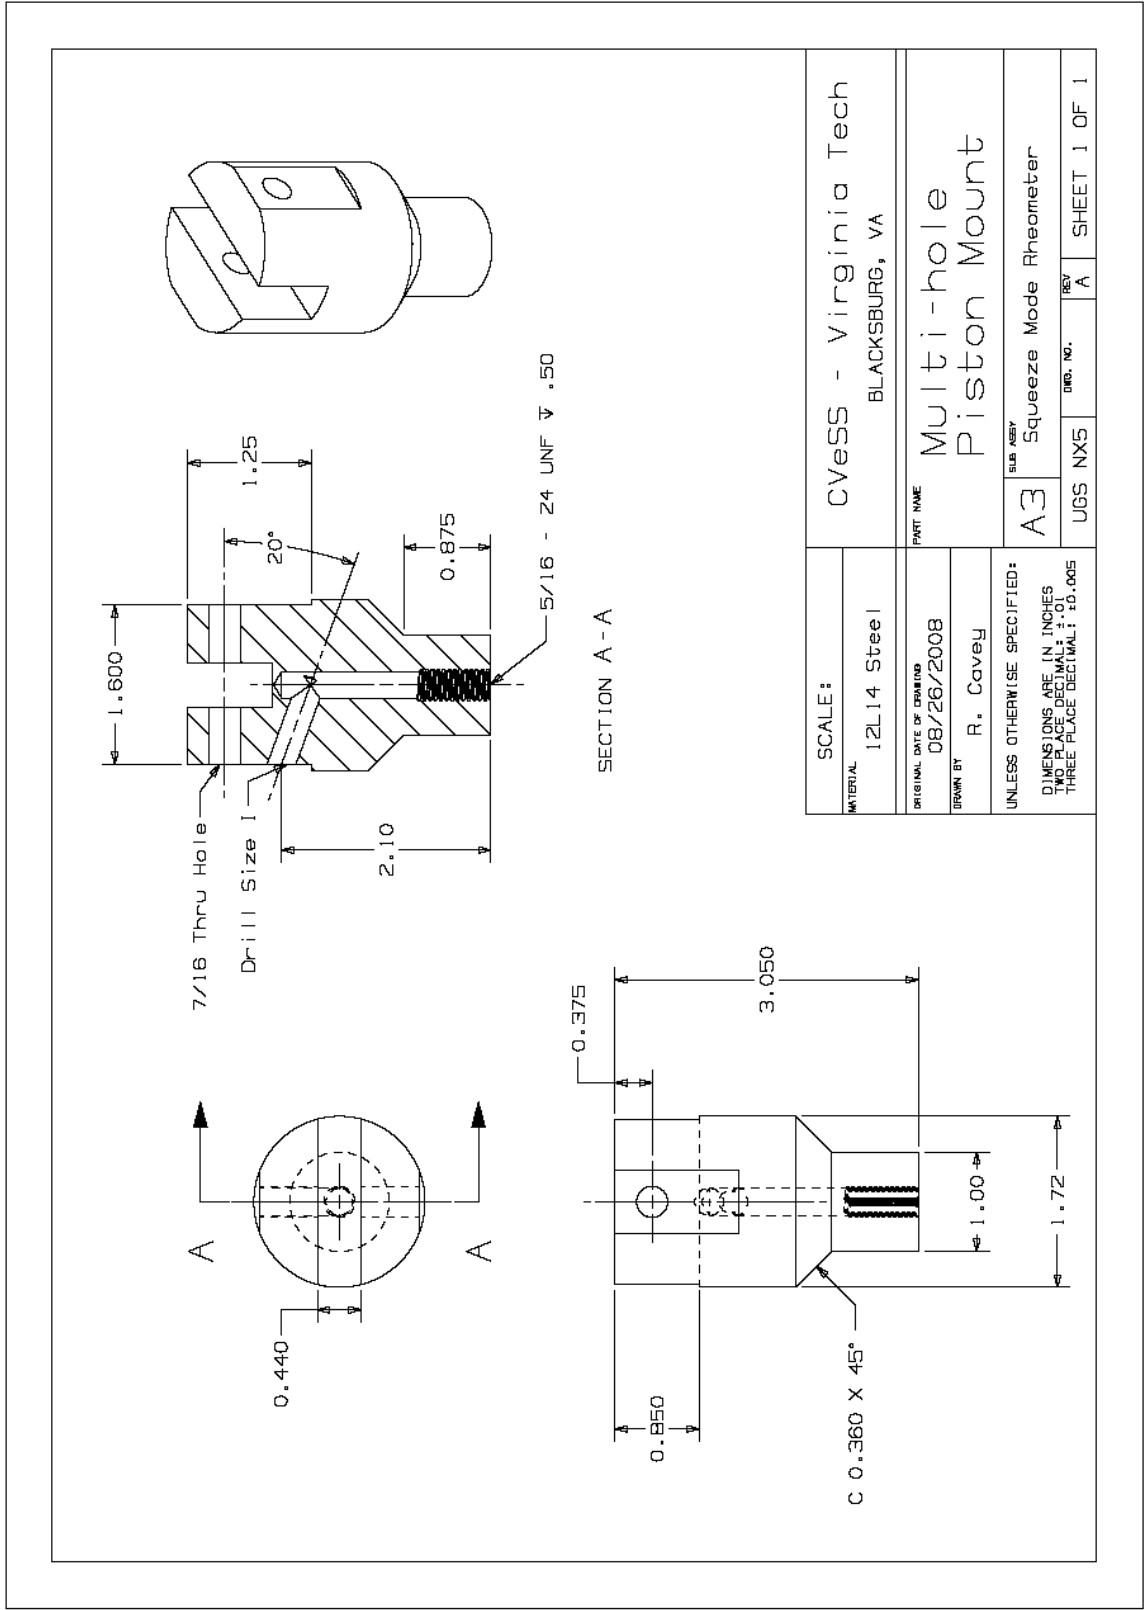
Detail drawing of the Multi-hole Piston Mount
